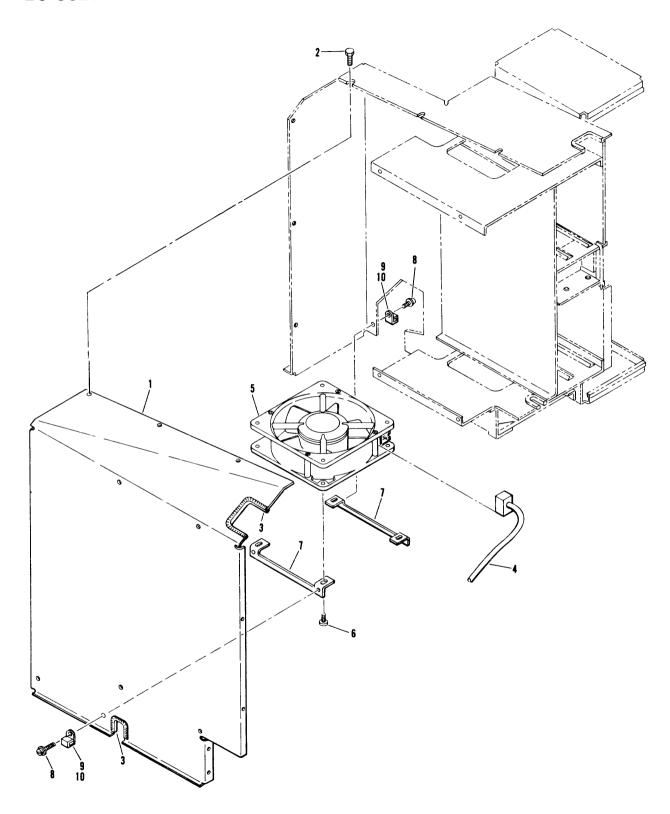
HOUSING ASM (SHEET 1 OF 2)
